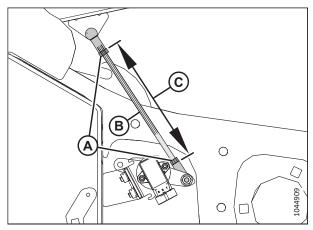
Reel Height Sensor – Right Reel Arm Lowered
